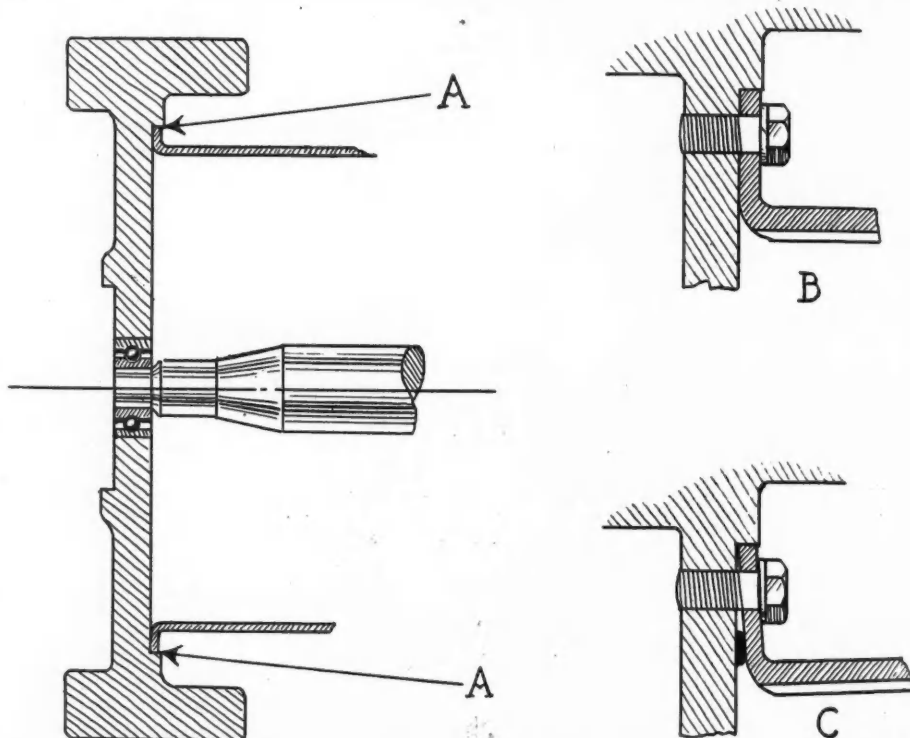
The clutch bolting flange recess, shown at A, must be concentric to .003 and held to the S. A. E. dimension of 11.500 in. with a minus of .000 in. and plus of .003. At B is shown a proper fit of the flange into the flywheel recess, while at C there is misalignment caused by a steel chip or other foreign matter. This causes the drum to warp.
